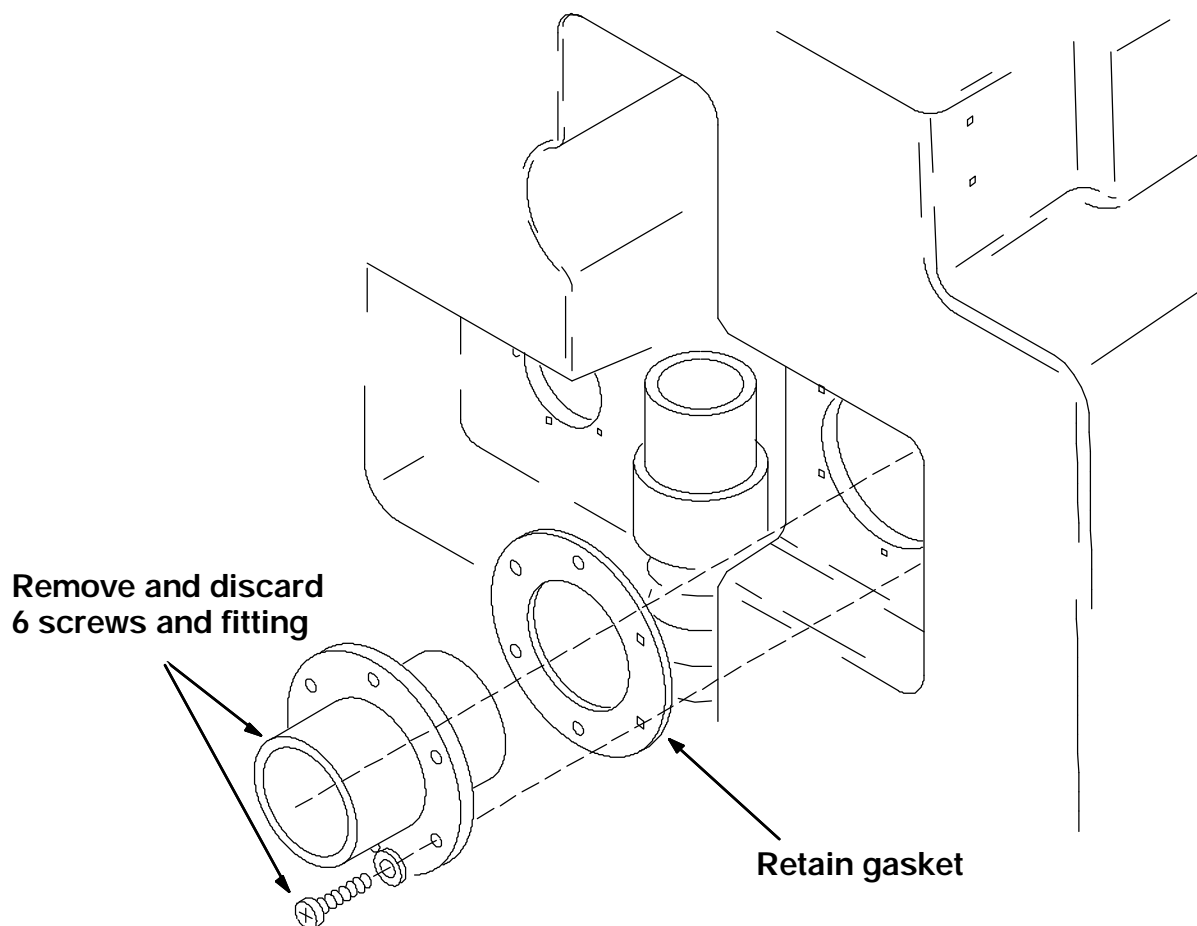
Remove Six Screws And Fitting From Tank -- Save Screws And Gasket
